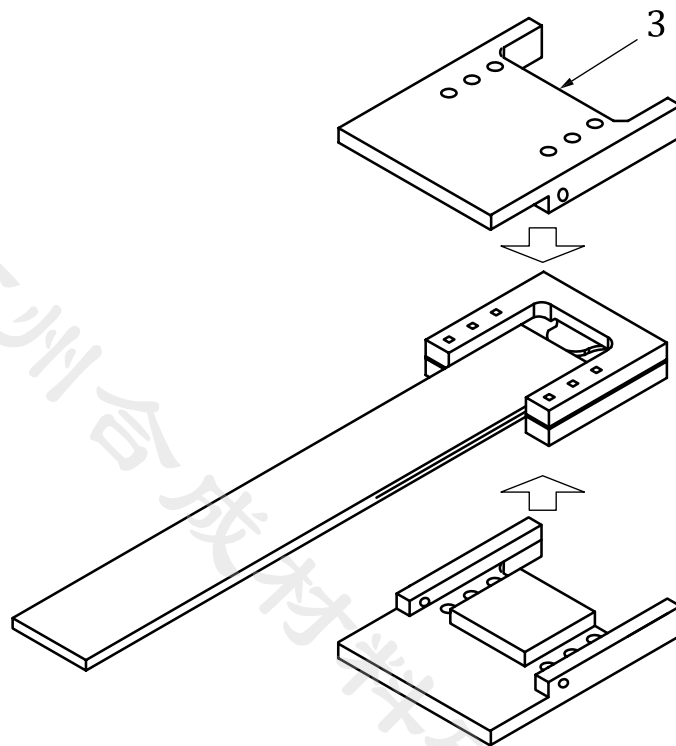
(#) a) to-c) show the procedure of setting up a DCB specimen with flat insert hinges. As shown in [Figure D.2](#) c), each cantilever beam is fixed to the hinge parts with the bolt. In this test fixture, insert parts have female threads on the outside, and the hinge part is thick for gripping the cantilever beam with the insert parts.
